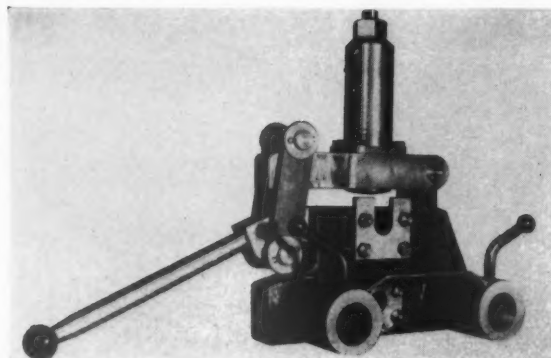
The improved die box assembly is quick acting for opening and closing the die and assists easy adjustment
